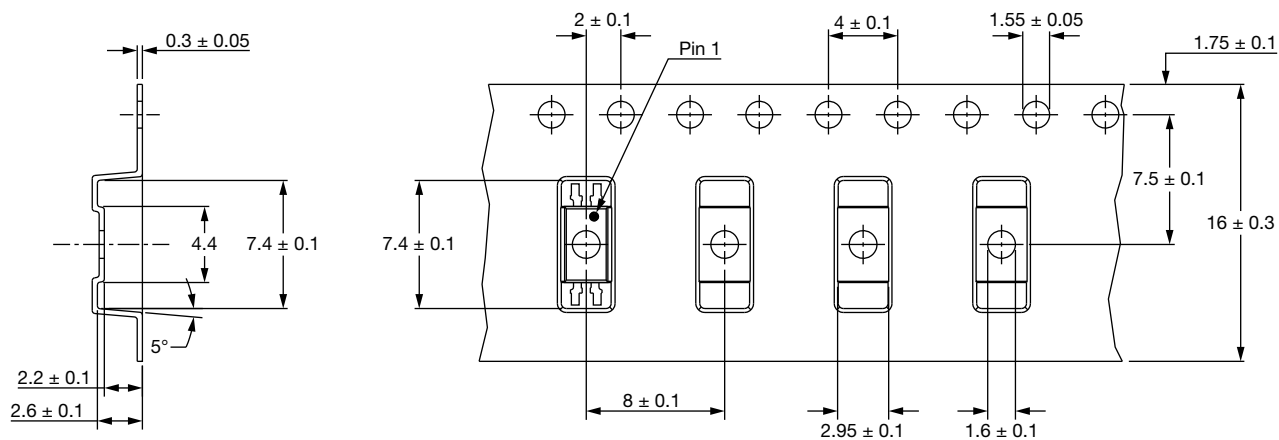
Tape and Reel Packing (3000 parts per reel)
